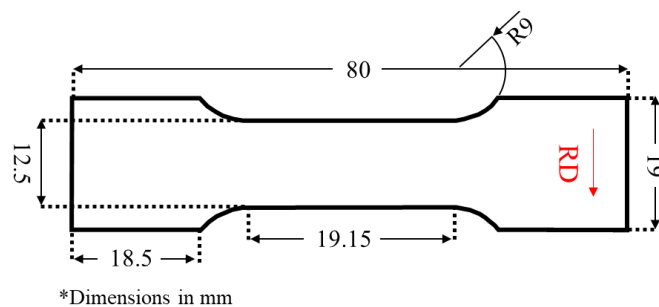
Sub-sized Tensile test specimen (dimensions are in millimeters)
